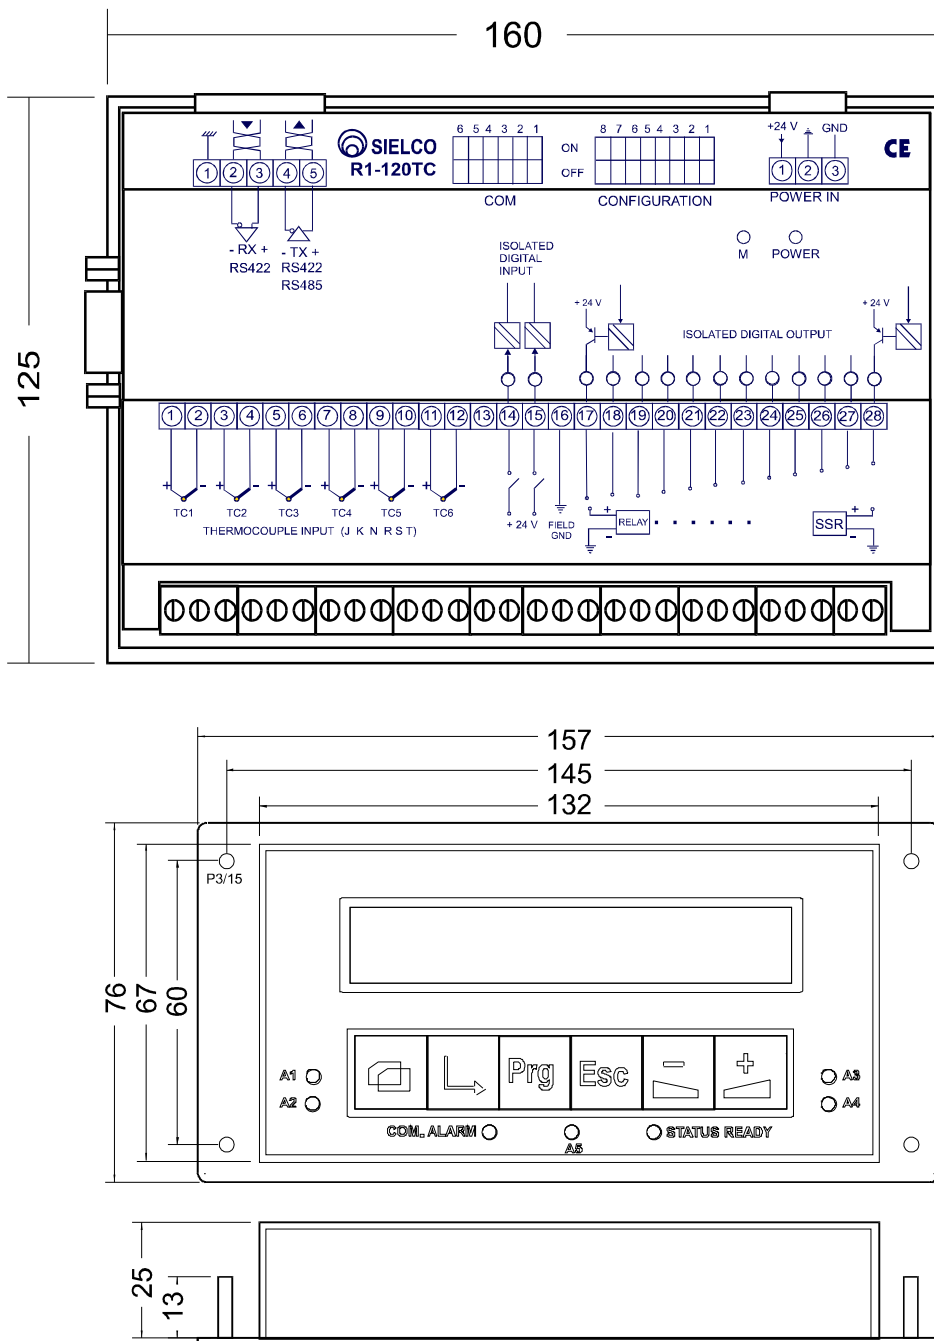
R1-120TC controller and F1-10 panel dimensions.
